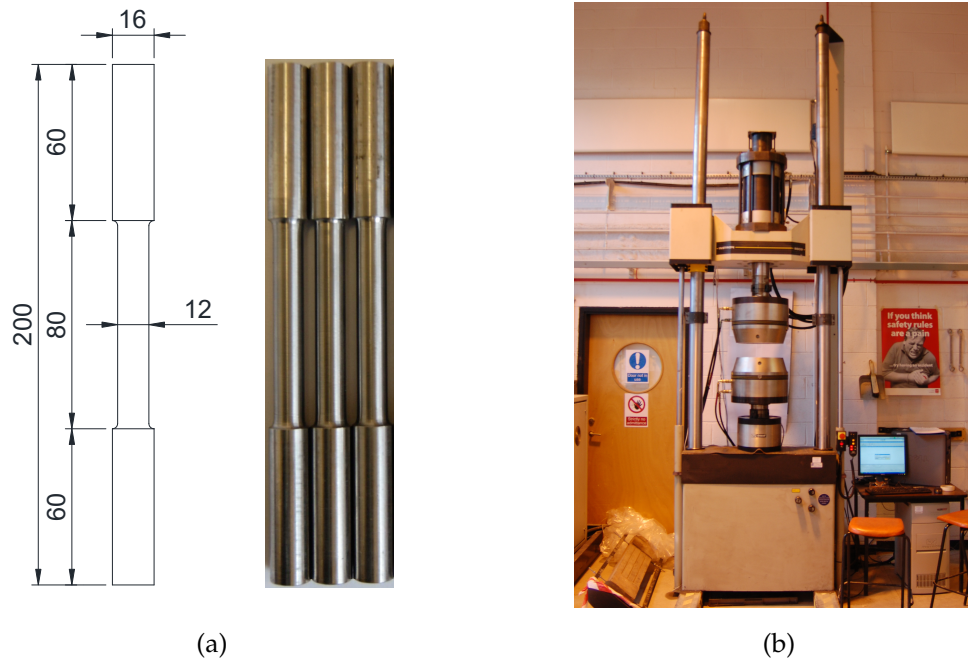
Round coupon specimens: (a) geometry (all dimensions in mm); and (b) Instron 8803 testing machine
